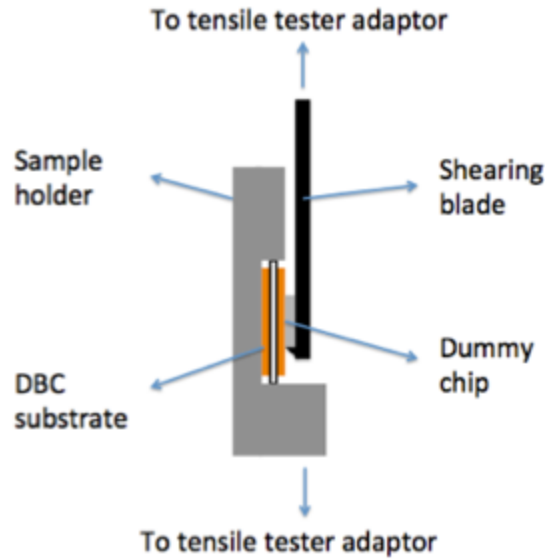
Schematic of 6 mm × 6 mm die-shear test
